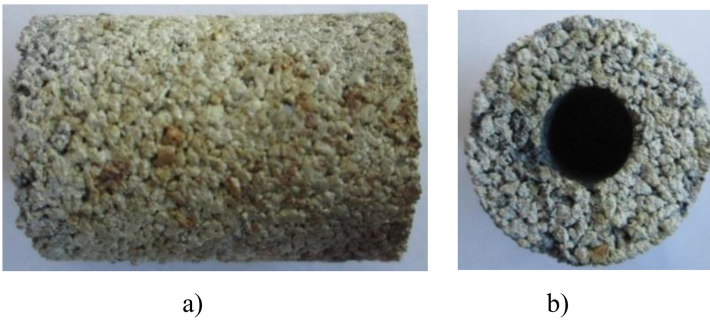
Pressed and sintered porous permeable insert of a nozzle: (a) side view; (b) front view.
